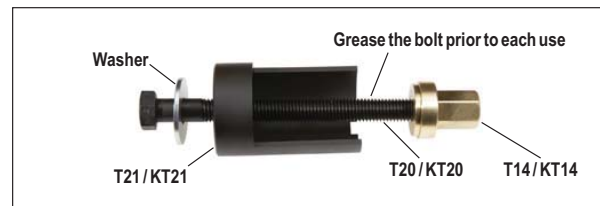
SHORT GUIDE PIN REMOVAL TOOL
